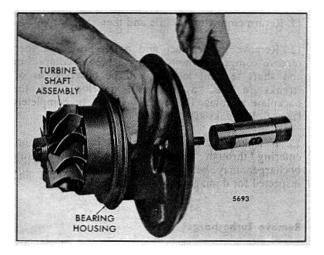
Tapping Turbine Shaft Assembly trom Bearing Housing
